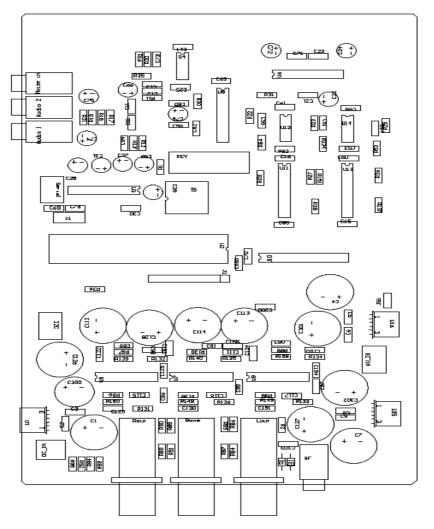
Component placement of the microcontroller based aduiometer PCB-1 (16 cm × 8 cm).
